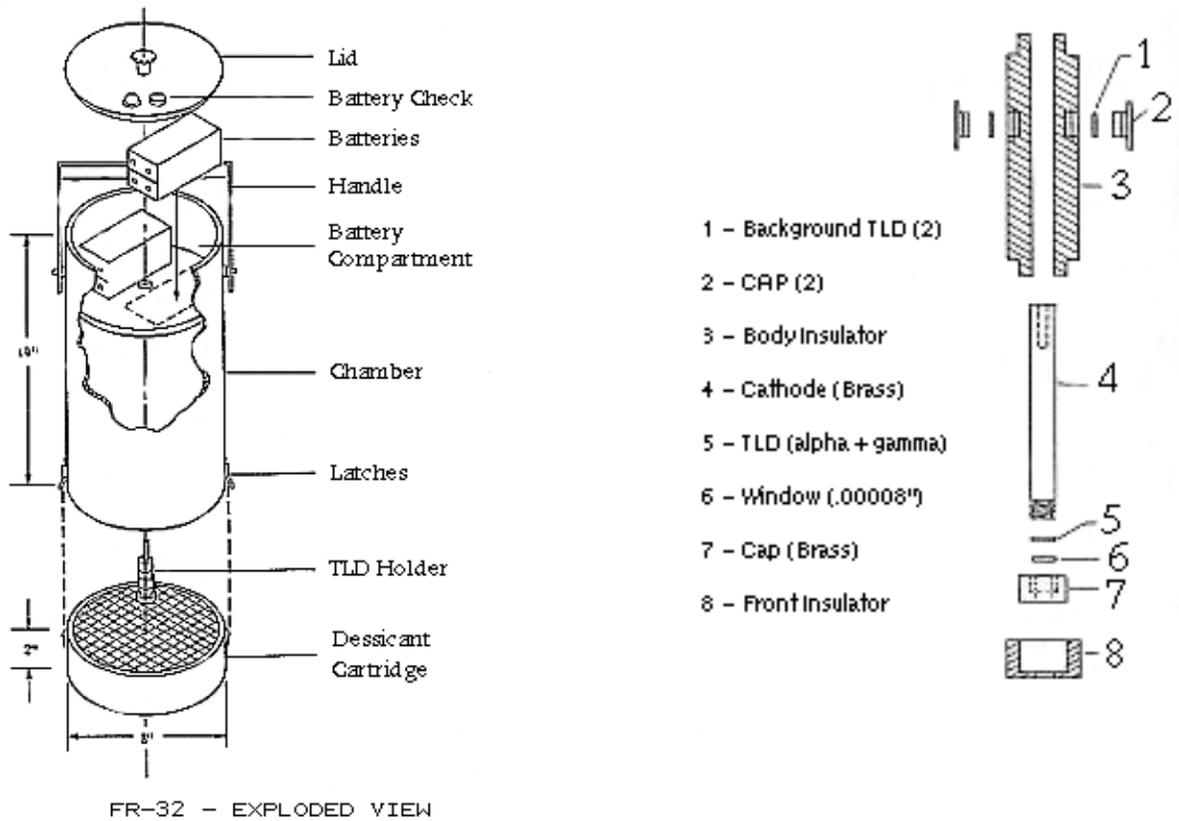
FR-32 Exploded View (Right); Detector Assembly (Left)
